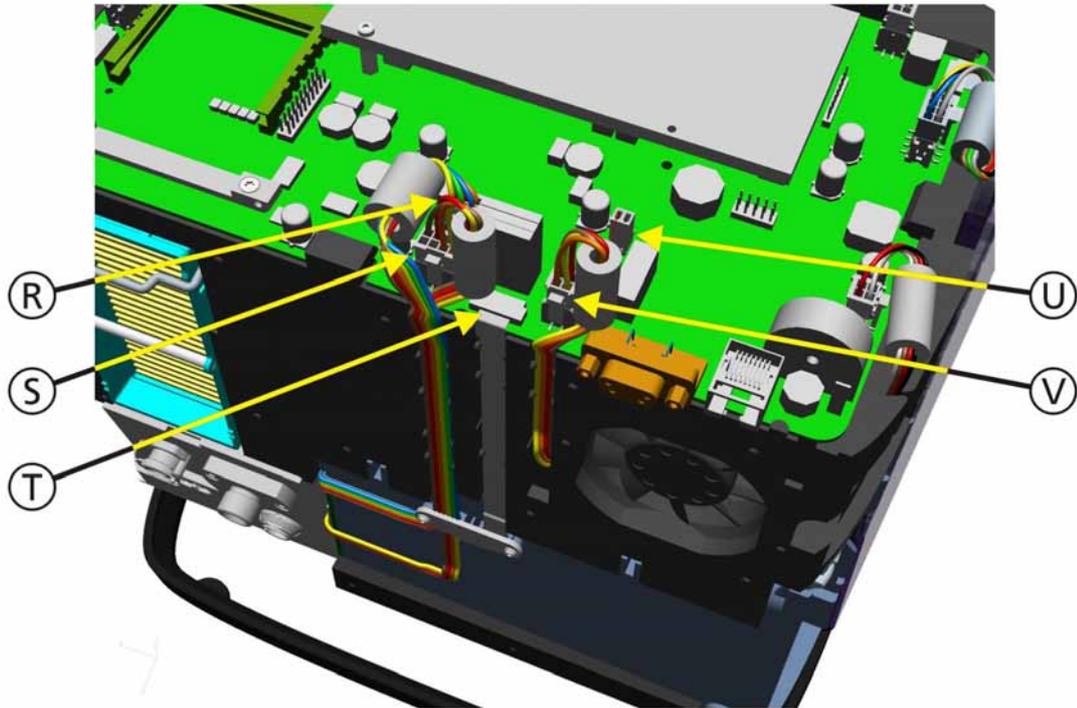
Top Foam Section and Mainboard Assembly, Step 6
